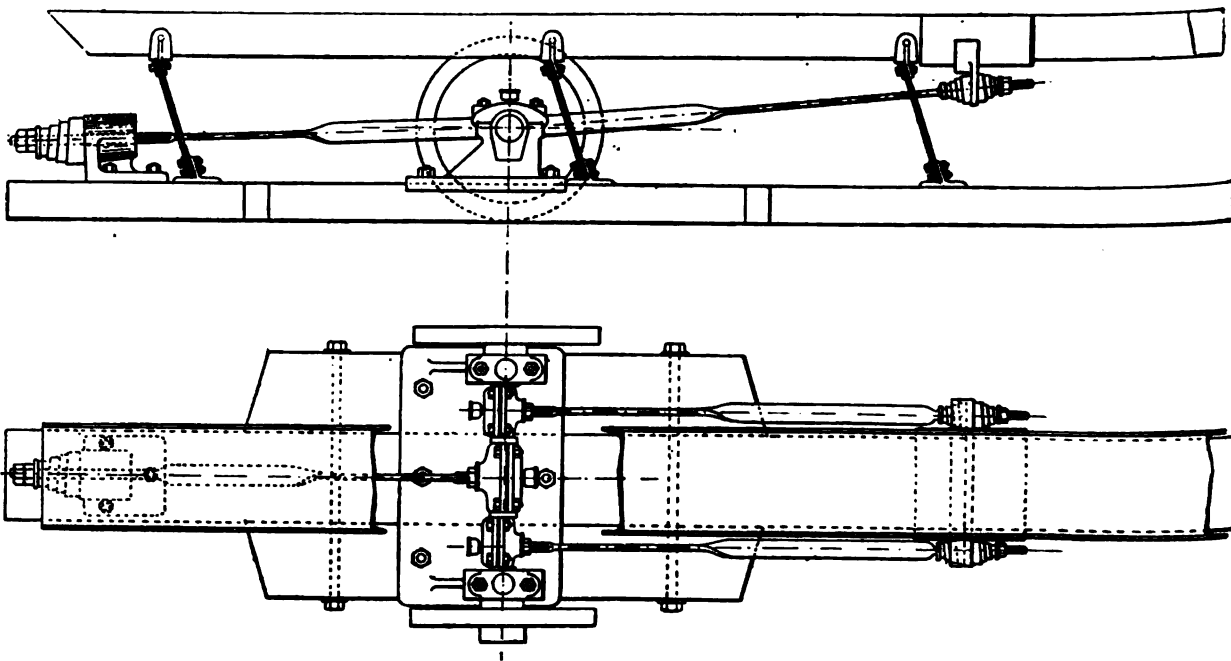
Swinging Conveyor Balanced by Terminal Volute Spring.
